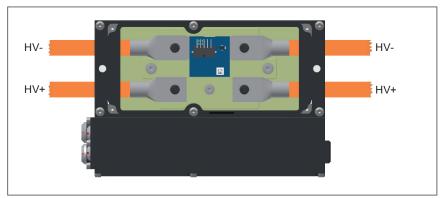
HV BM 1.2, power cable HV- (>35 mm²), placing the ring terminals on the threaded bolts
